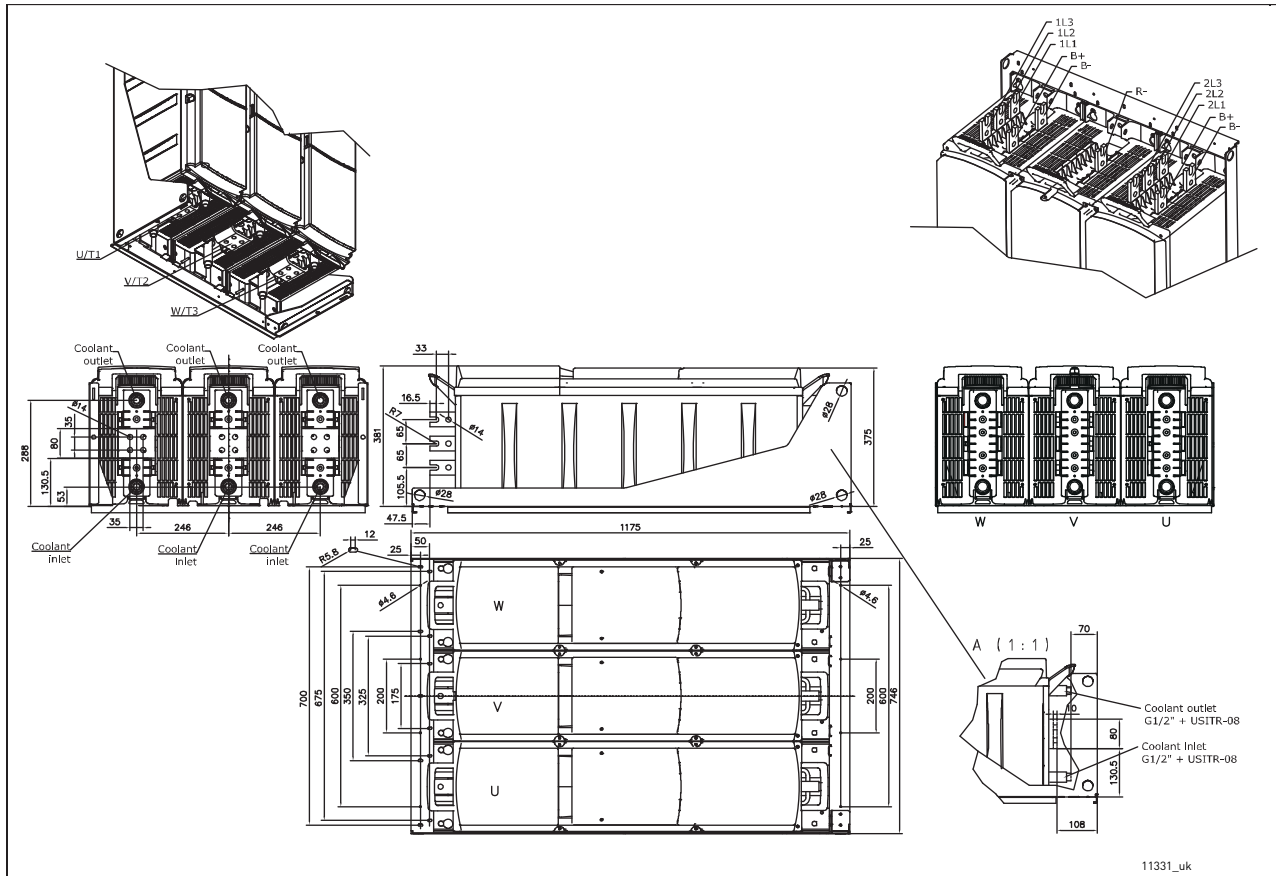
VACON[®] NX Liquid-cooled AC drive (6-pulse) with internal brake chopper dimensions, CH74, IP00 (UL open type)
